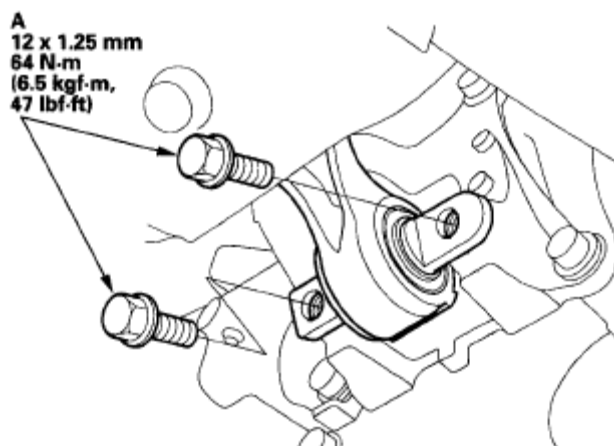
Identifying Lower Torque Rod Bracket Bolts (With Torque Specifications)
